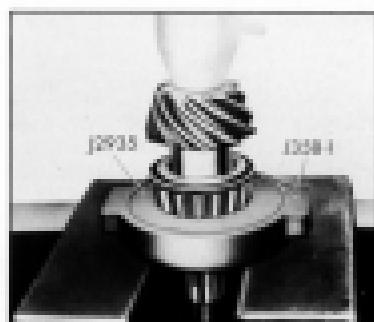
Assembling Rear Bearing Inner Race and Roller Assembly
